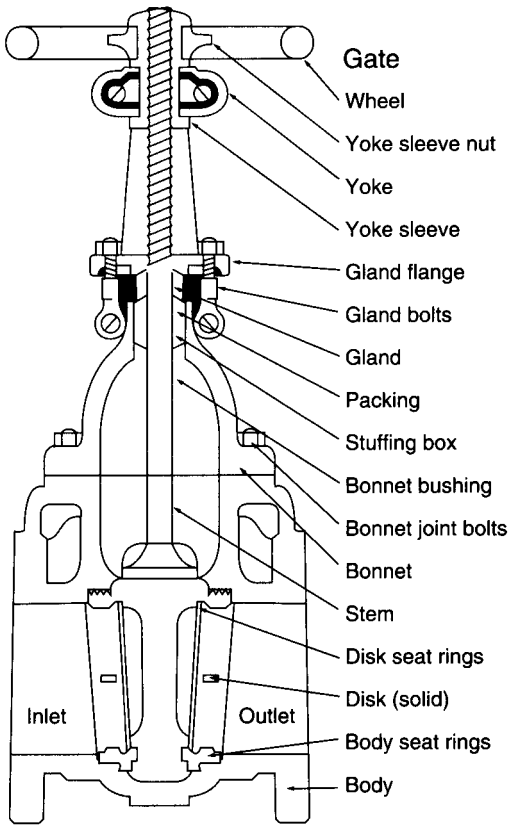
Gate valve. (Courtesy Stockham.)
